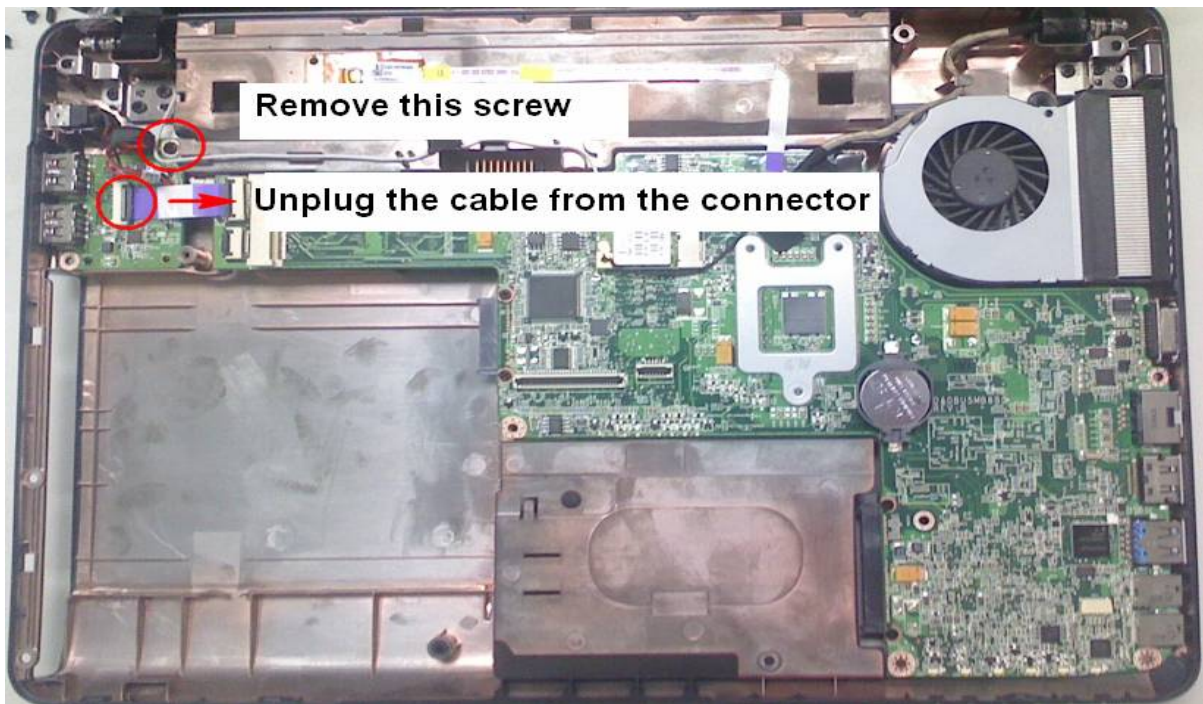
Remove screw and unplug USB/B-MB cable
